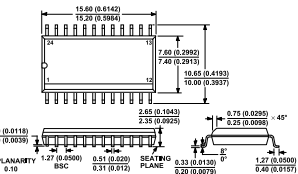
24-Lead Standard Small Outline Package (SOIC) Wide Body (R-24)
